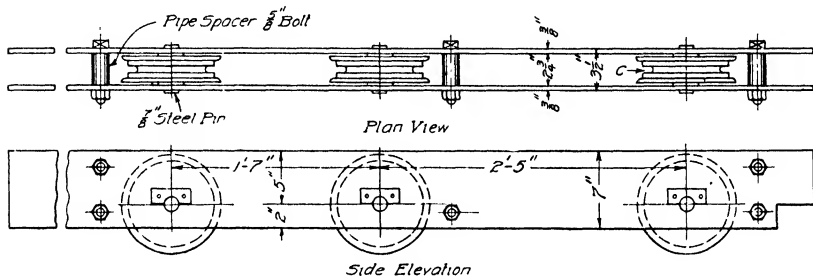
Plan and Side Elevation of Sheave Bars for Basement Elevators
